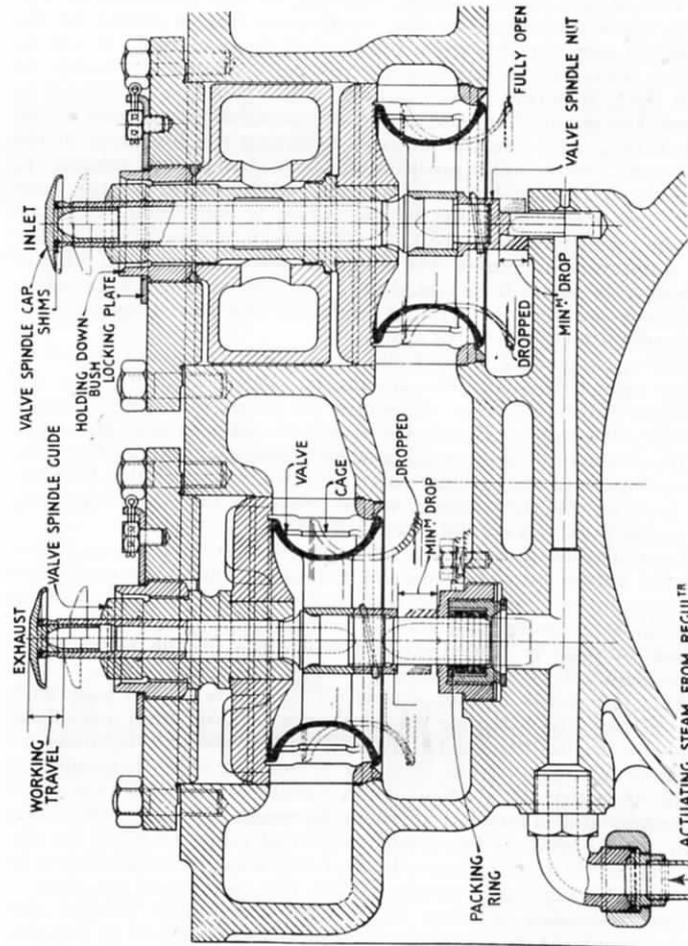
SECTION THROUGH STEAMCHEST SHOWING STEAM-ACTUATED POPPET VALVES.
